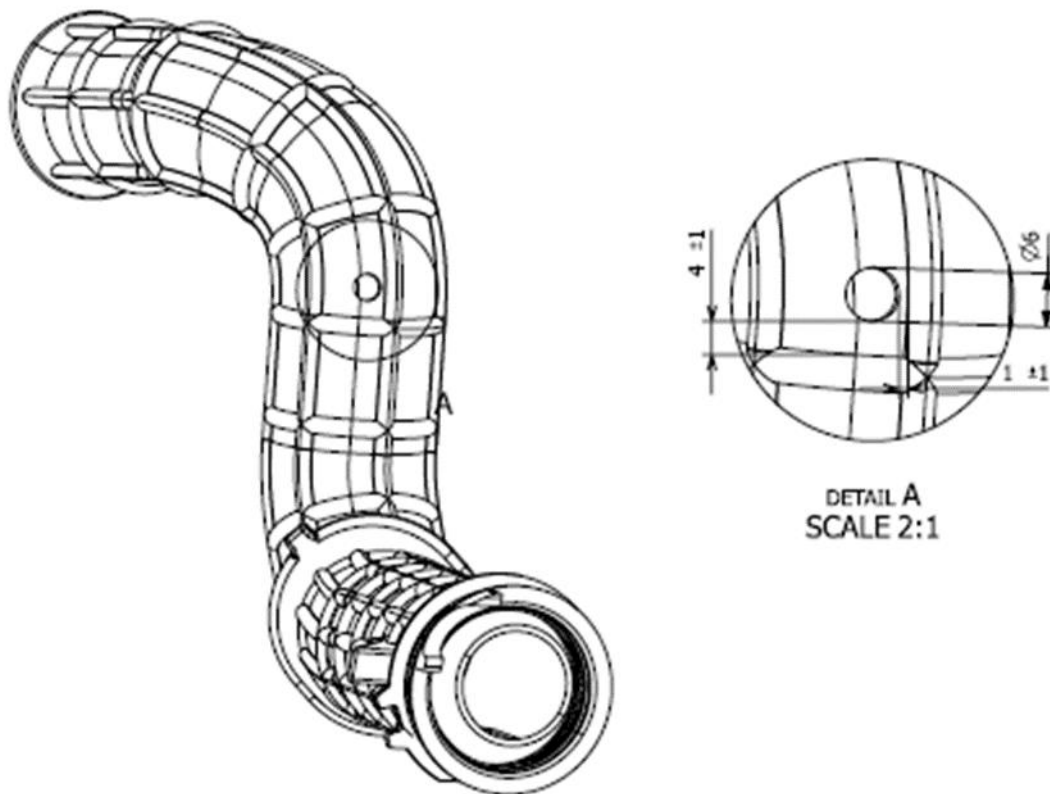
Dimensions and hole distances on the Tube AC Connecting K25G product
